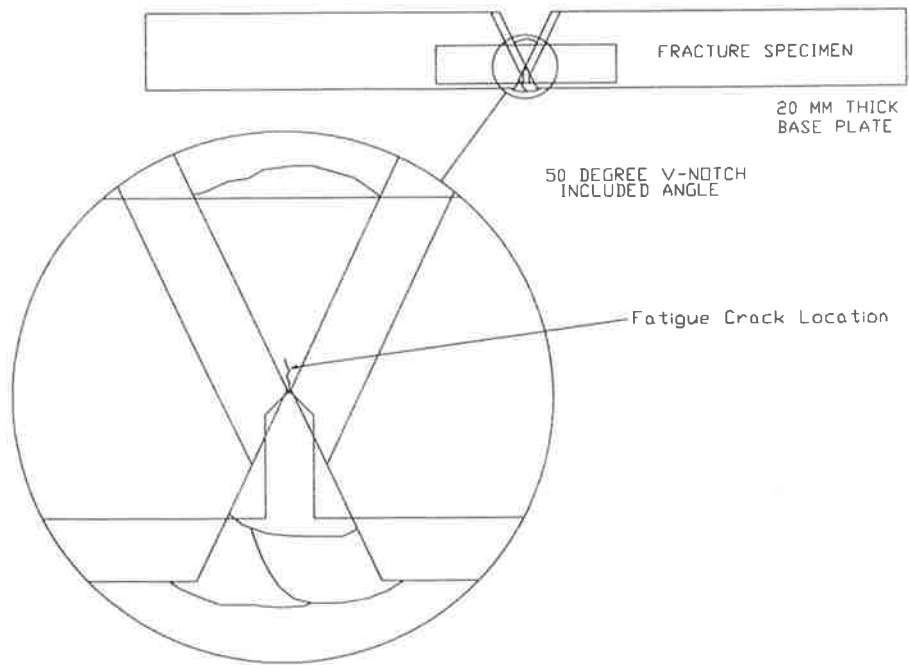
Location of Fracture Specimen In Weld Deposit
